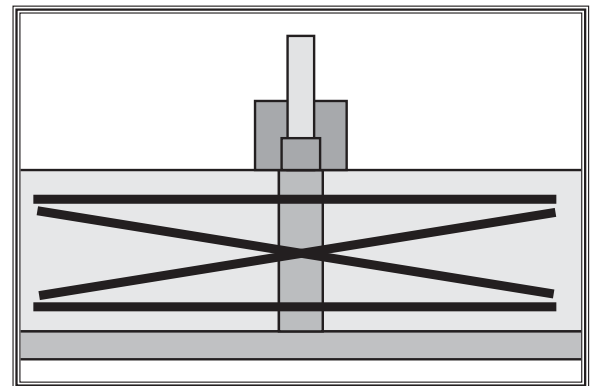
Straightedge positions for checking infeed/outfeed parallelism.
